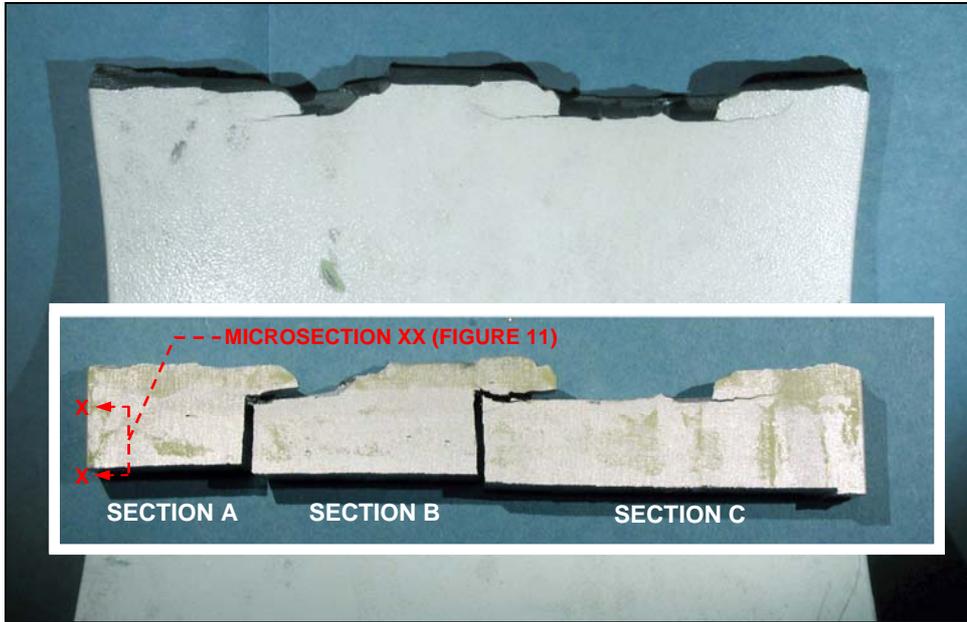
Close view of the fracture location, from the concave face of the spring. The inset shows locations of sections made, to reveal previously obscured crack surfaces
